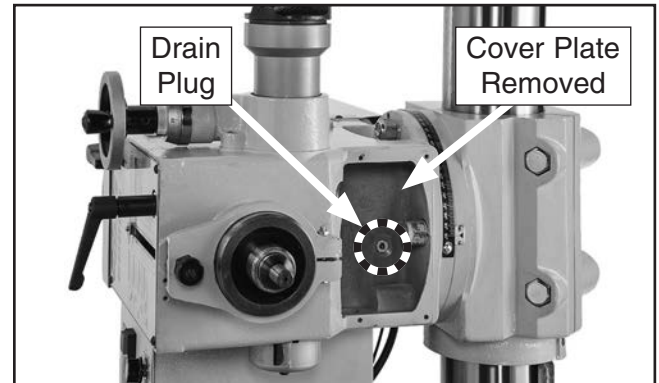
Headstock drain plug (headstock tilted 90° for clarity).
